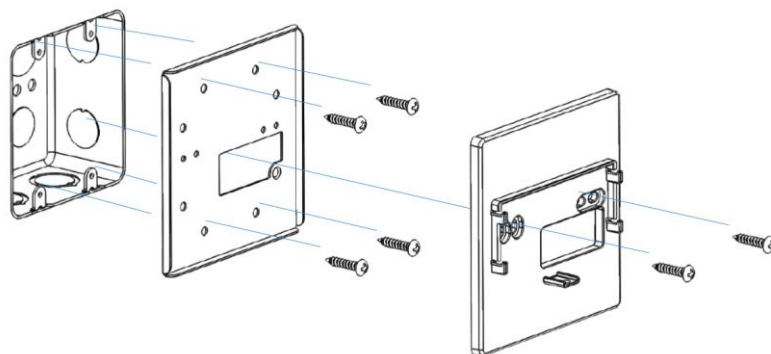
Install LOYUNO-L with large wall mount kit and 2 gang embedded junction box.
